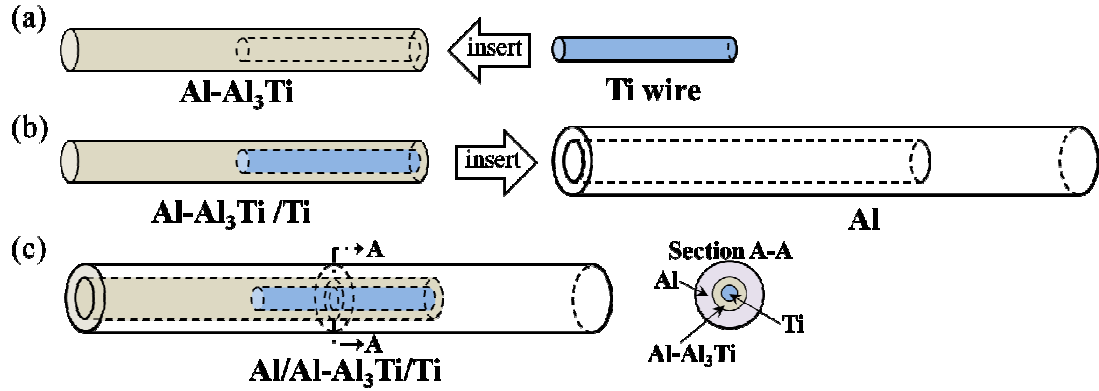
A schematic illustration showing the assembly steps in preparing the FGM billet with stepwise gradient in strength: (a) Ti wire is inserted into a hole in the Al-Al₃Ti alloy rod. (b) The Al-Al₃Ti/Ti composite is inserted into a hole in the pure Al rod. (c) The FGM billet is fabricated.
